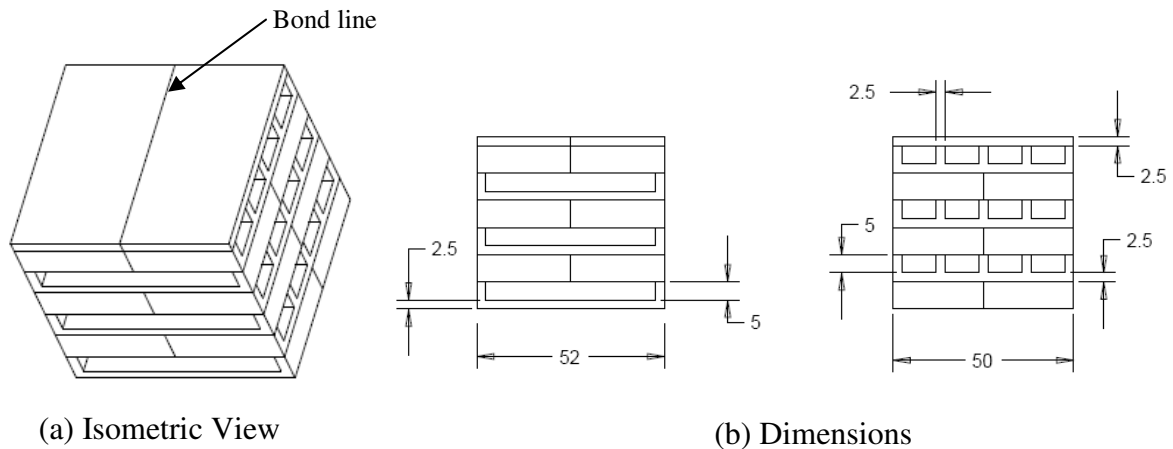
Prototype Heat Exchanger Building Block Dimensions (in mm)
